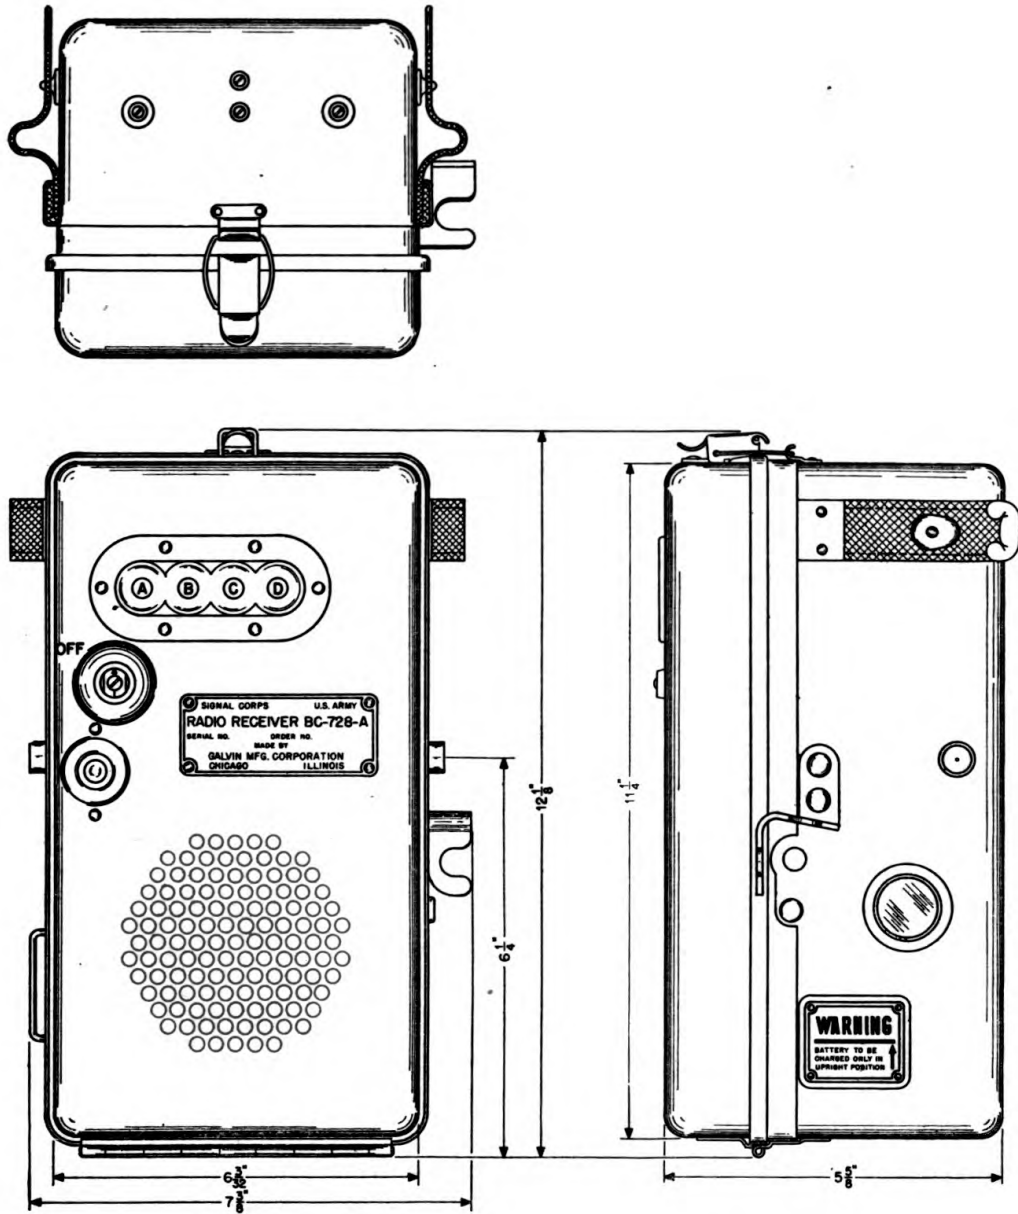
RADIO RECEIVER BC-728-A, OUTLINE DIMENSIONAL DETAIL
